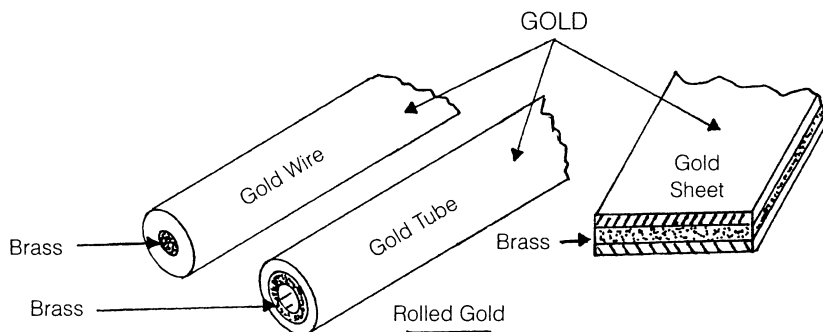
Cross section of gold-filled (gold-rolled) material
